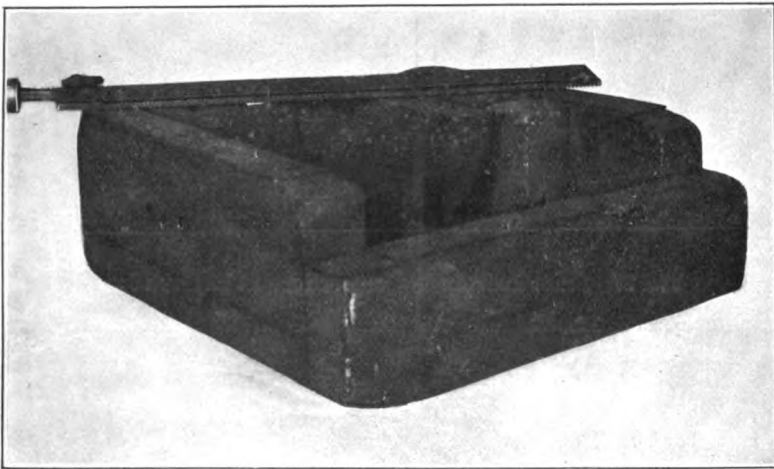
JIG FOR FILING PASTING SURFACE OF JACKET CORES
